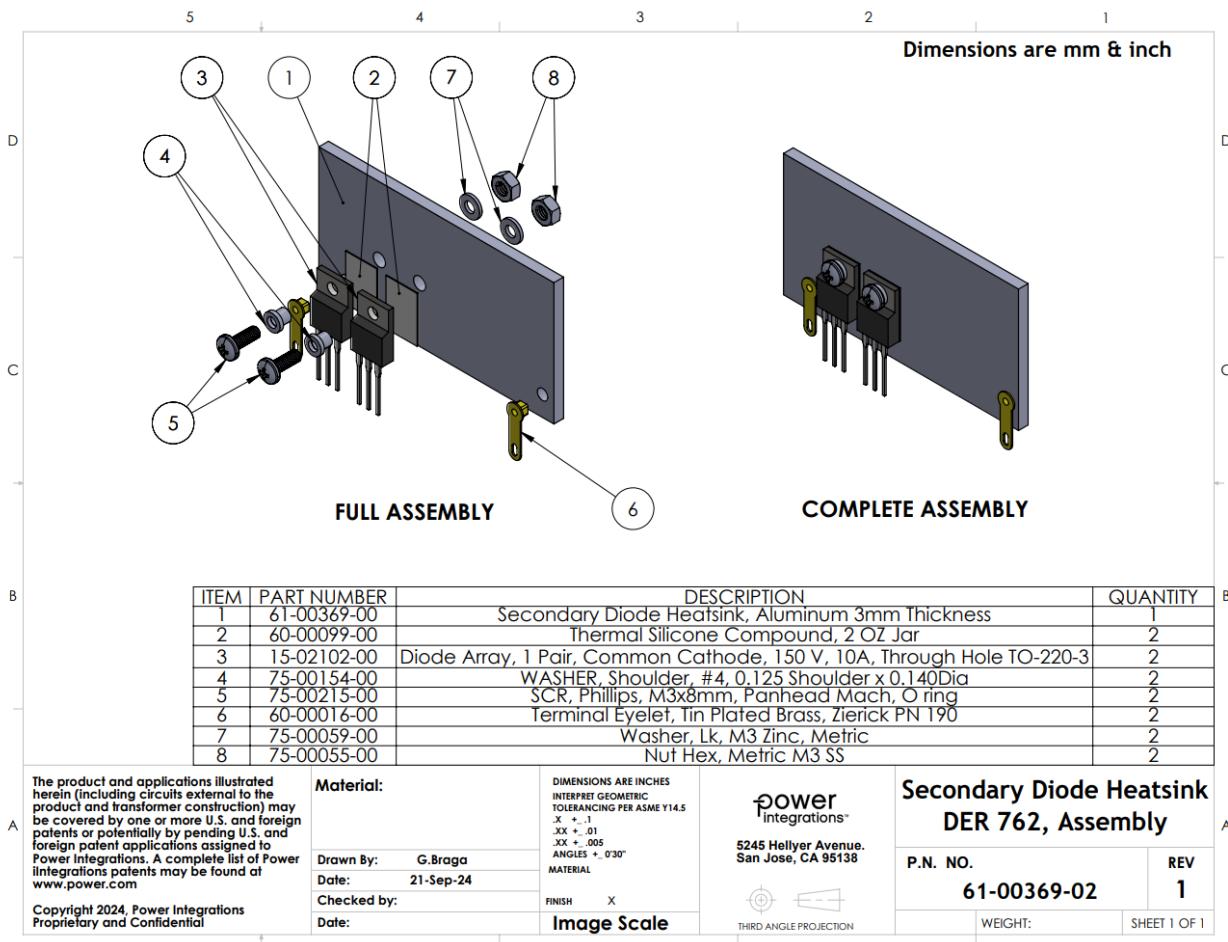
DER-762 Secondary Diode Heat Sink Assembly.
